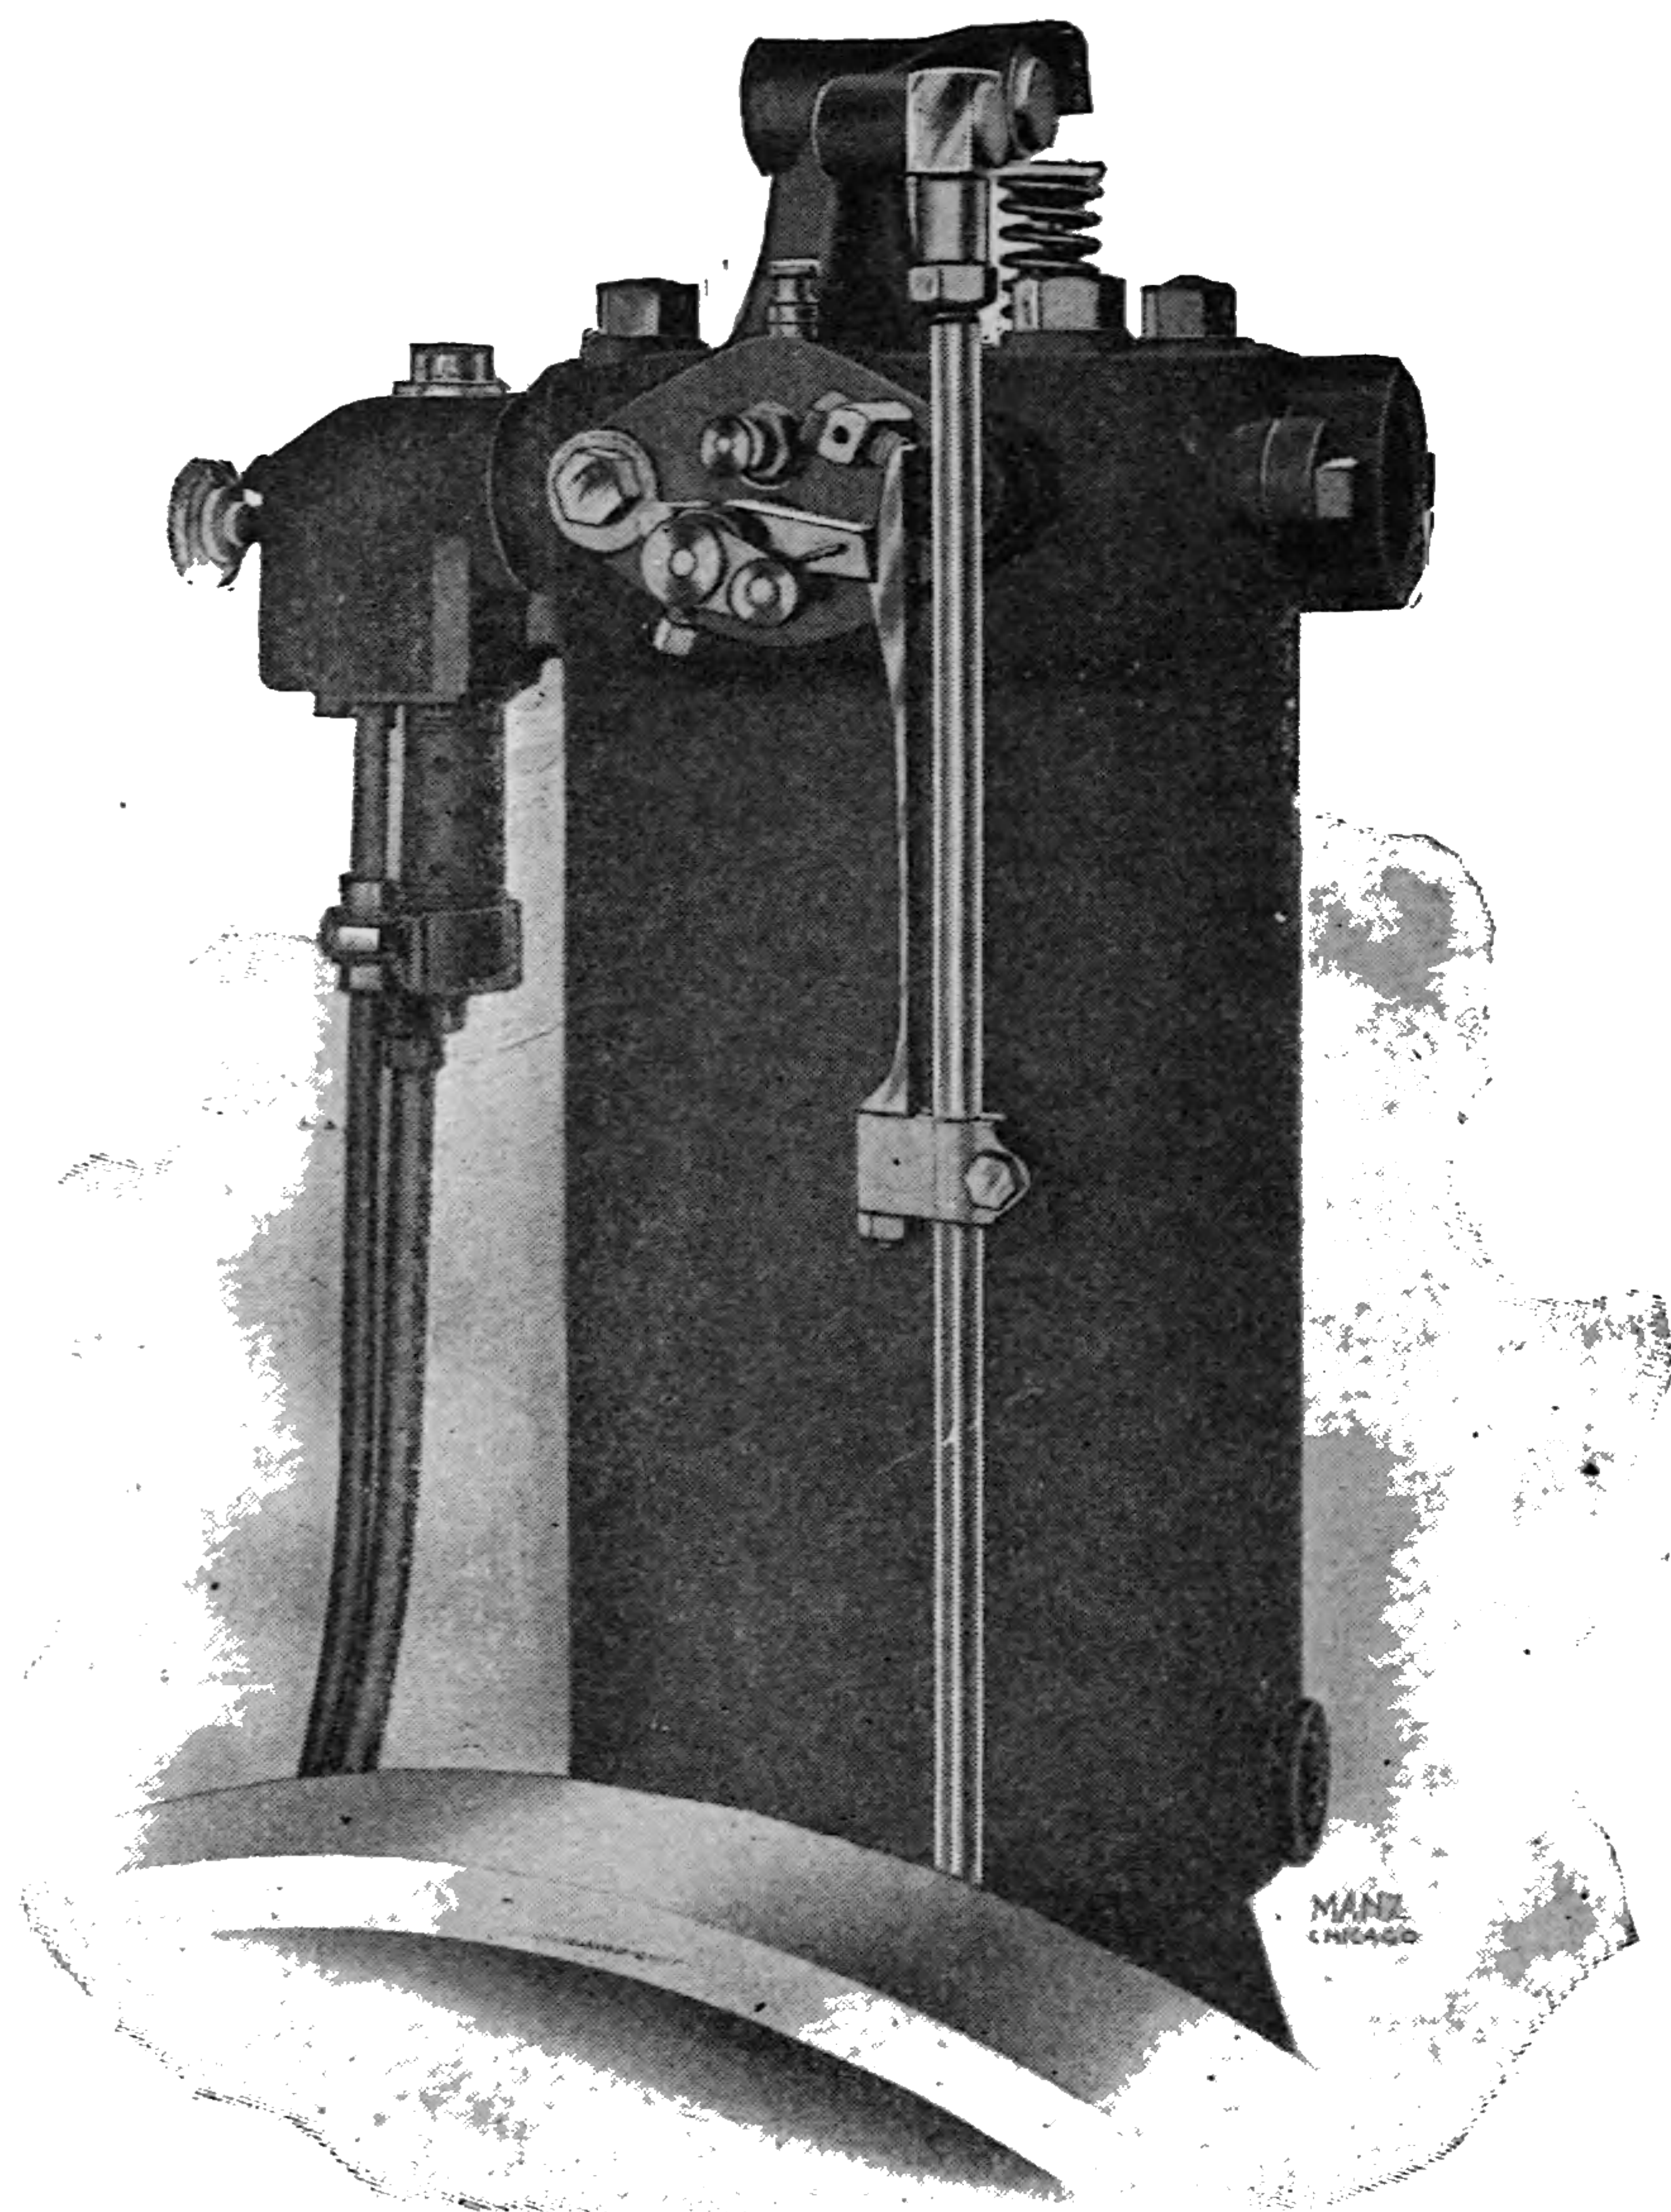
EXHAUST VALVE ROD AND SPARKING TRIP DEVICE.
